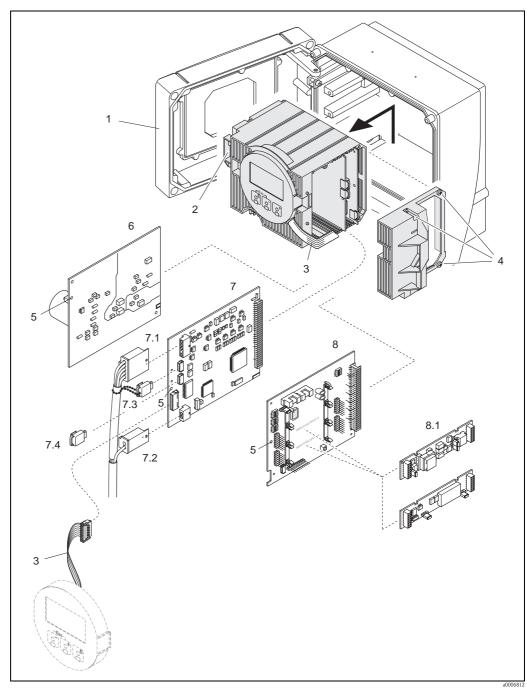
Wall-mount housing: removing and installing printed circuit boards
